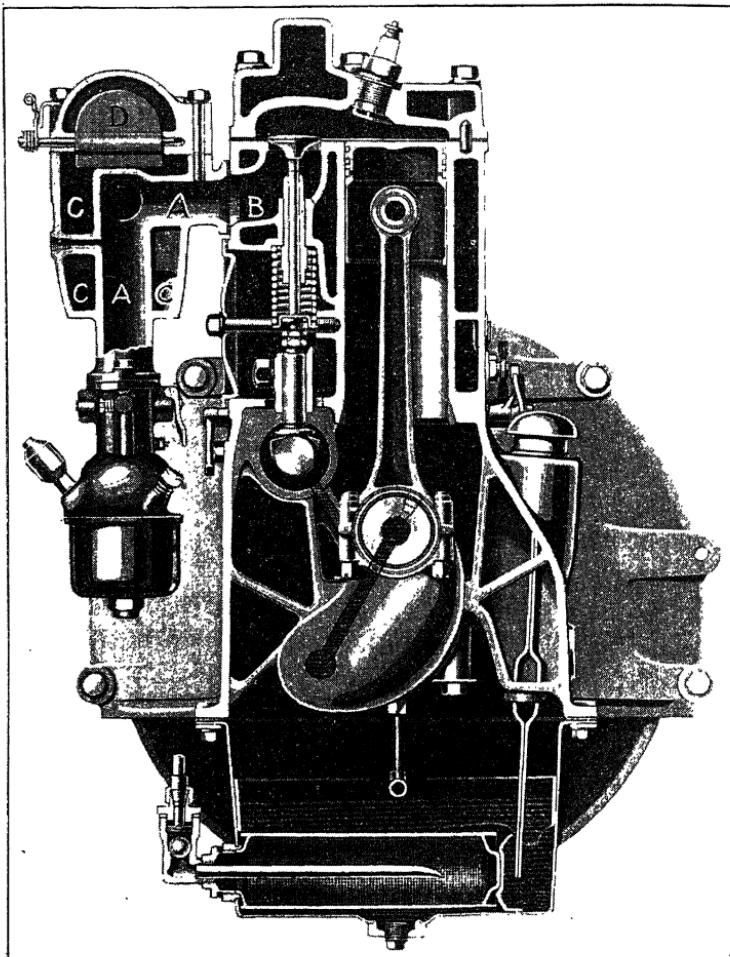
Cross Section of Manifolds, Ports and One Cylinder of a Typical Vertical Automobile Engine
